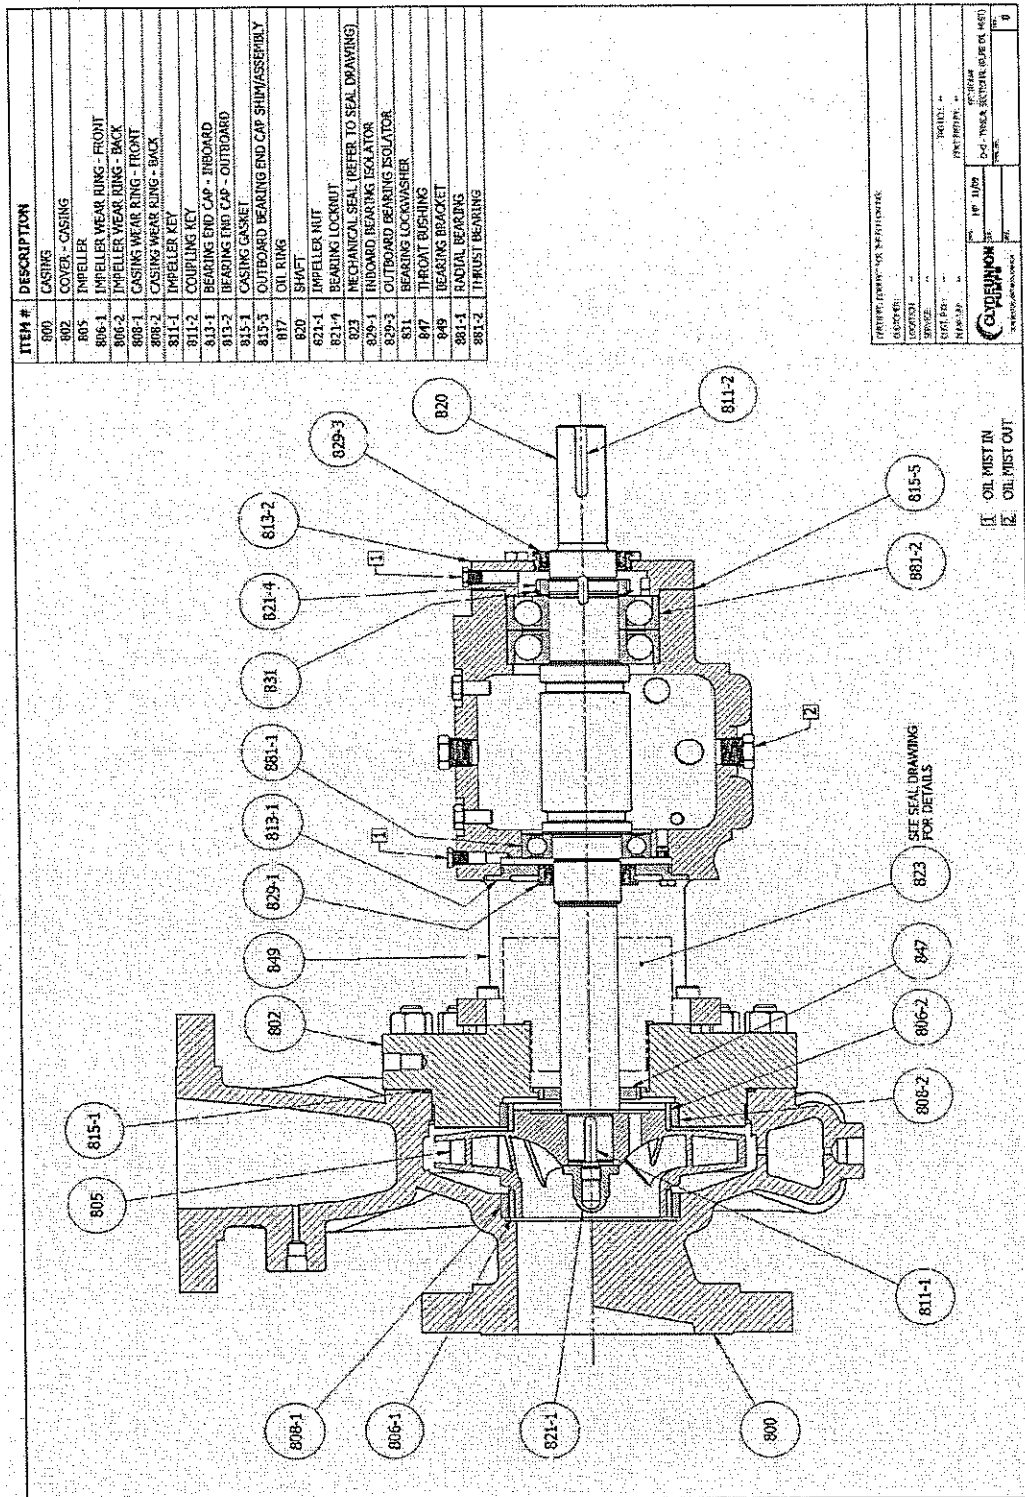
Sectional Drawing, Oil Mist Lube Configuration
